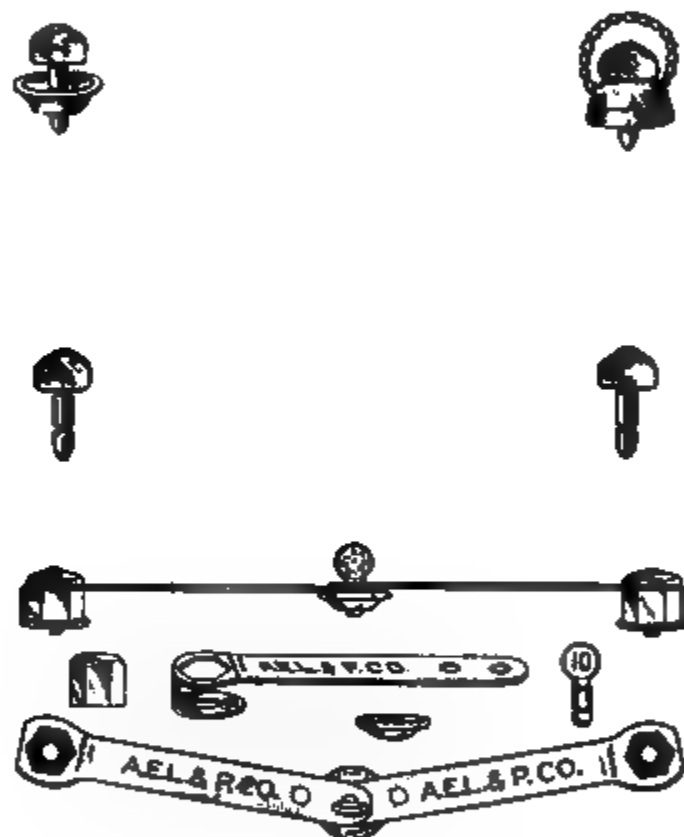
Seal with Straps and Removable Plunger. Security Seal Company.
